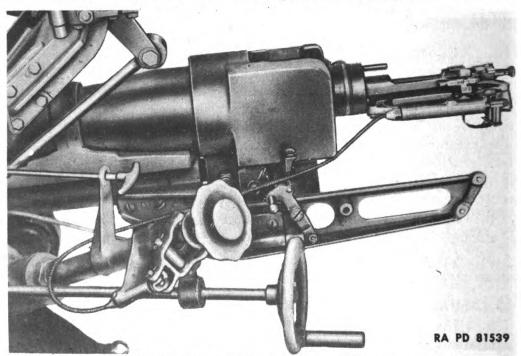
Cal. .22-.30 Subcaliber Equipment M6, Assembled to Gun M3 and Carriage M4
